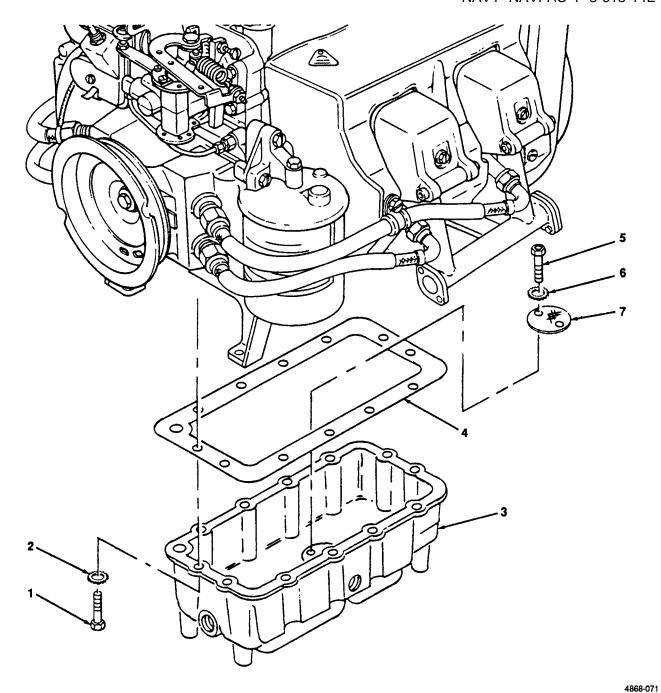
Oil Pan, Removal, Inspection and Installation.
